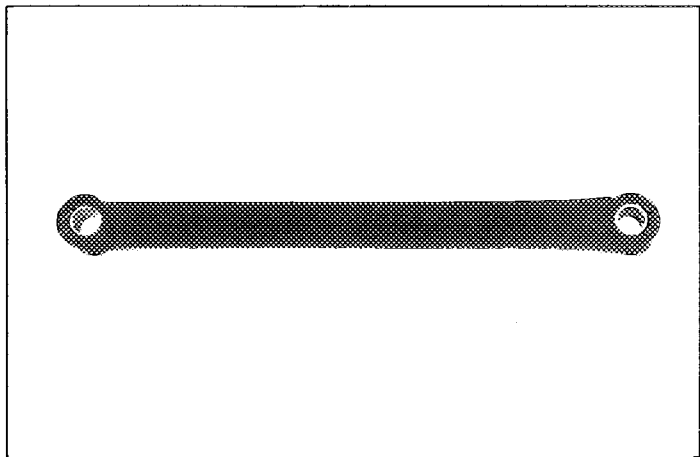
Reinforced front stabilizer with linkage TYPE A
